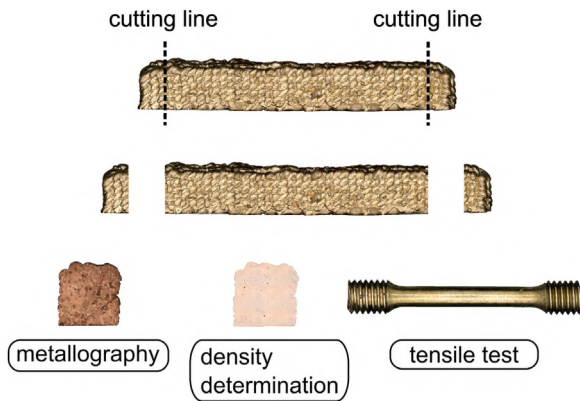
Post-processing methods. The ends of the specimens are cut off by machining and embedded in resin. A round tensile specimen is made from the center piece of the specimen.
